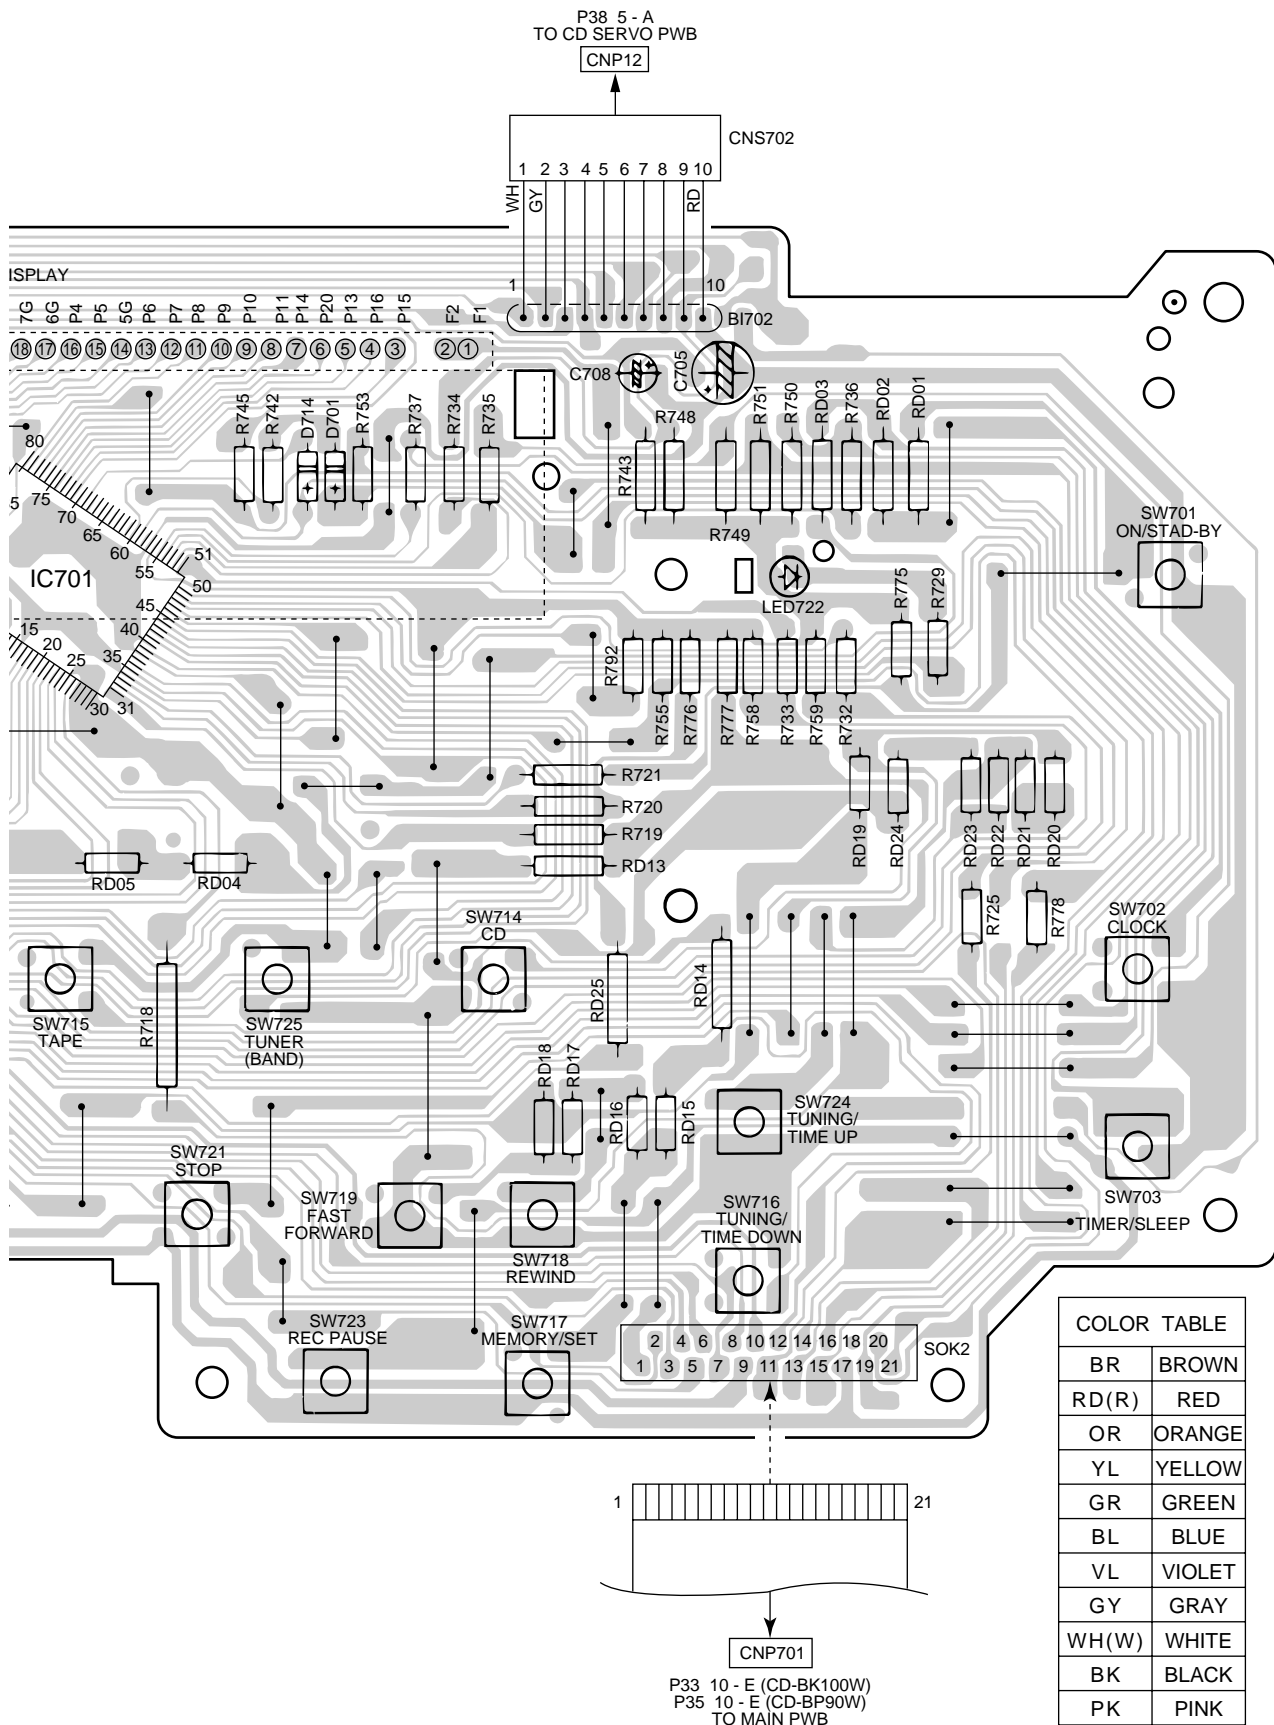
WIRING SIDE OF P.W.BOARD (6/8)
